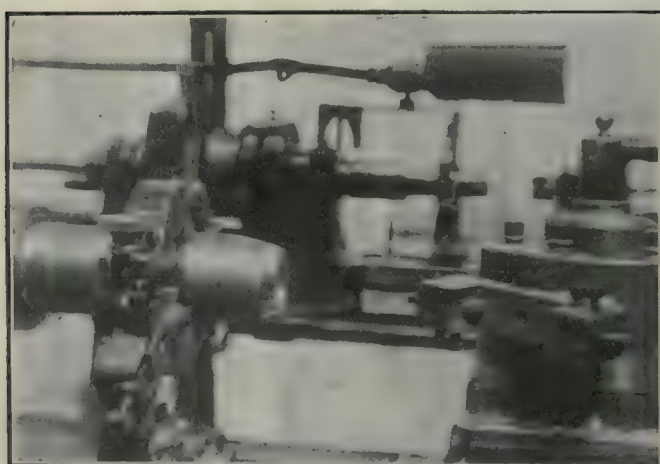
WARNER & SWASEY TURRET LATHE TOOLED UP FOR FINISHING BRASS SOCKETS.
